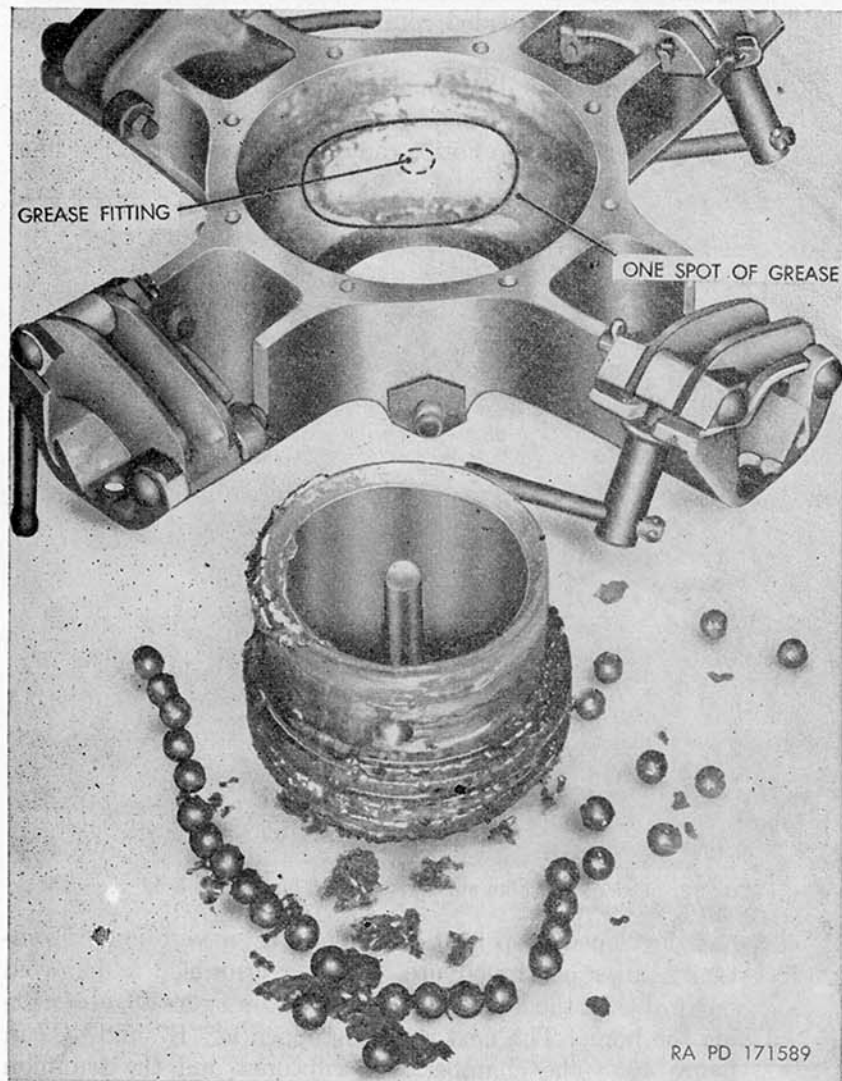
Disassembled base assembly of cal..50 anti-aircraft machine gun mount M63.
